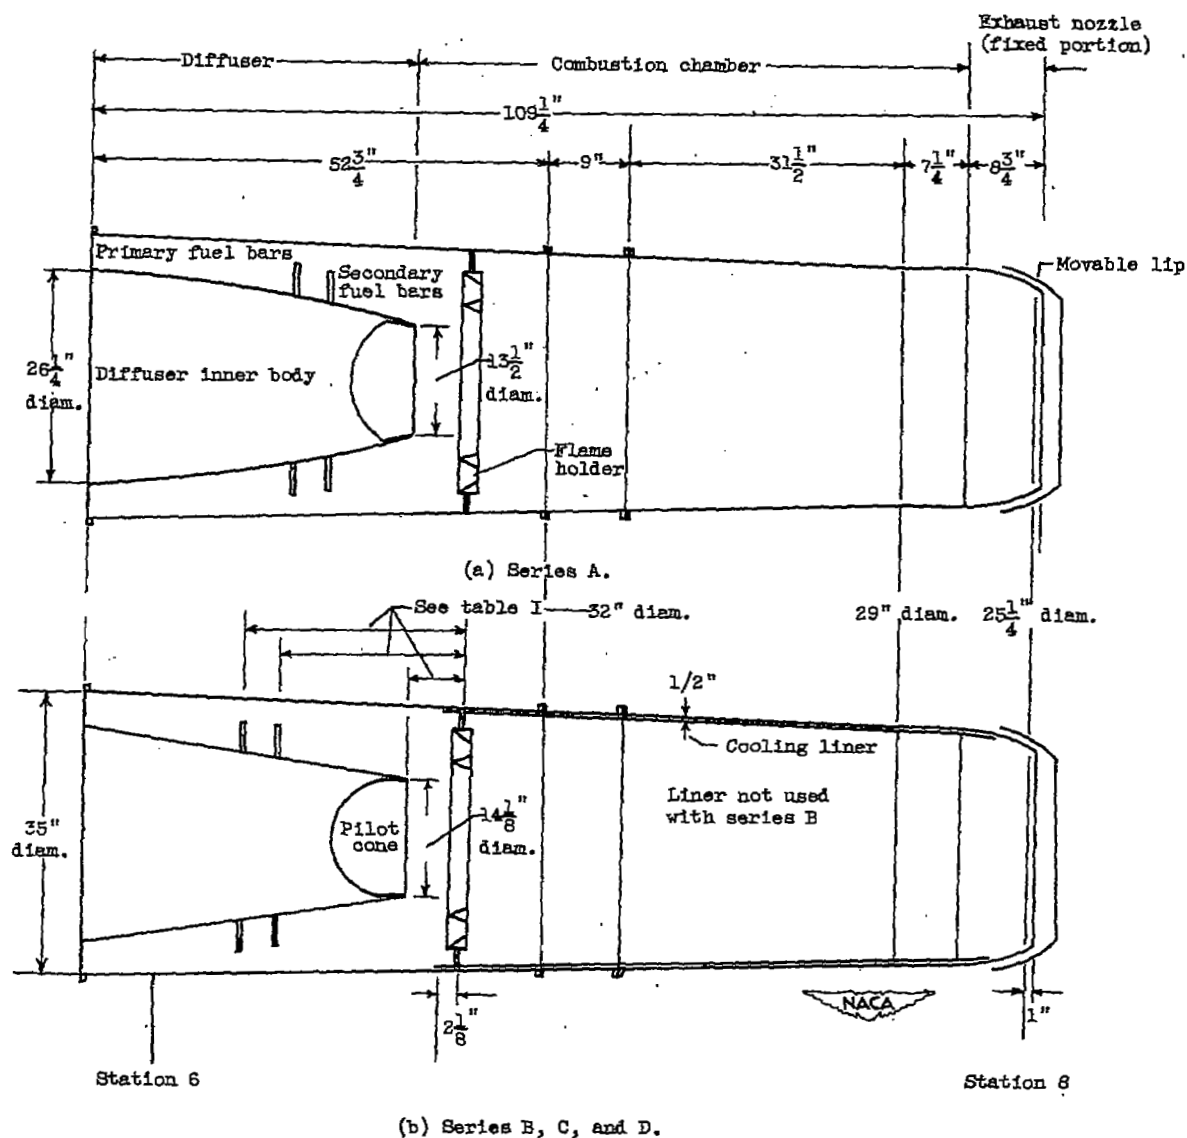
Schematic drawing of afterburner showing variation of diffuser inner body.
